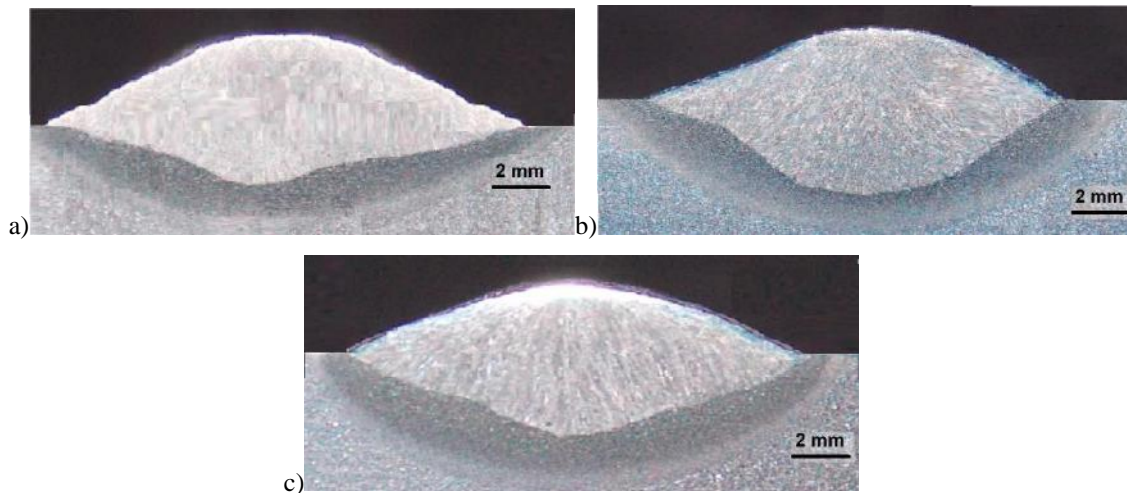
Macrographs of the sections of the “bead on plate” coupons produced with filler metals
